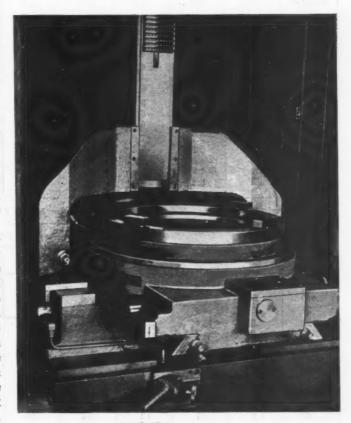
Shuttle Type Fixture Mounted on Broaching Machine, which Holds Thirteen of the Clutch Disks Shown in Fig. 1
